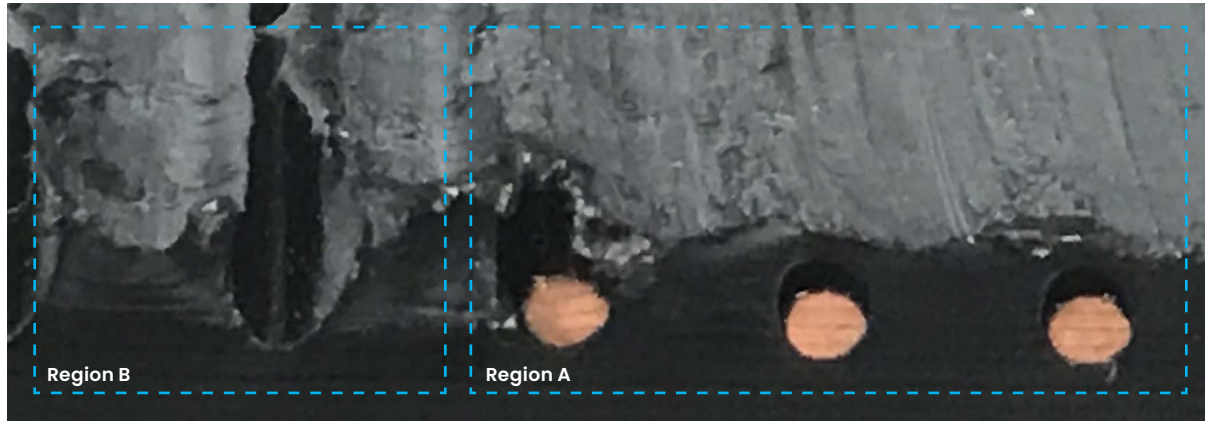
is a close-up, side view of the EF fitting weld that matches the pipe side shown in Figure 12 below.
